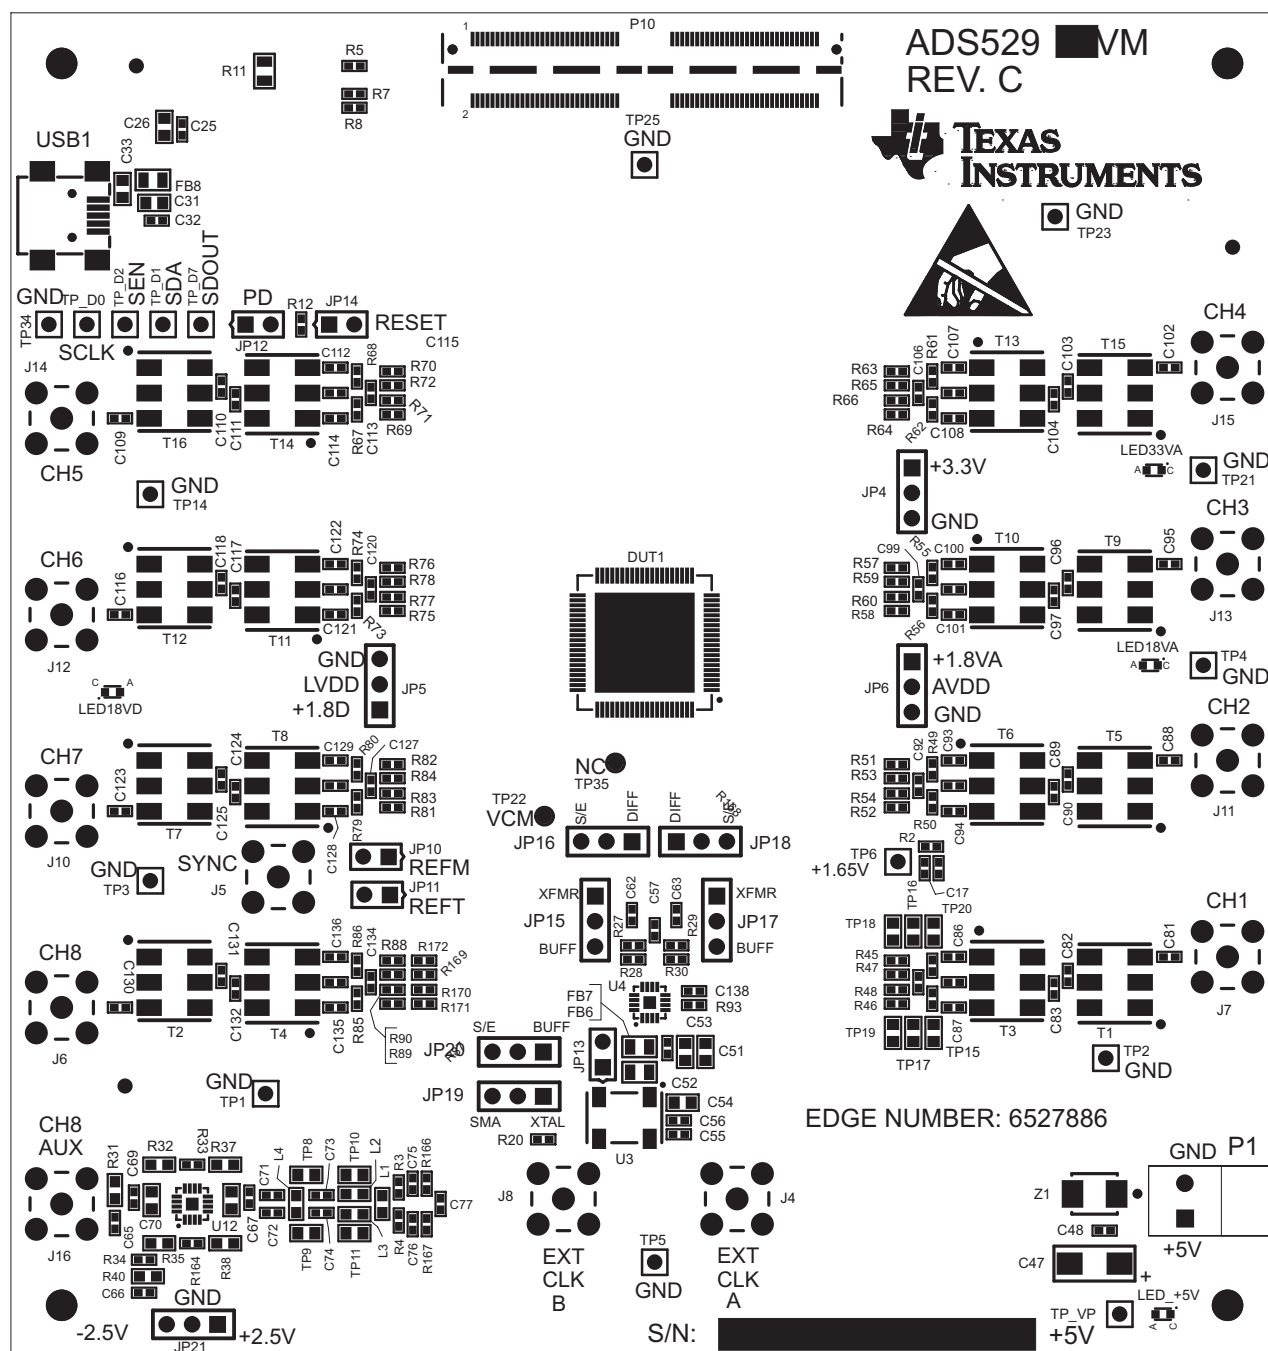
ADS5294EVM Top Layer Assembly Drawing – Top View
